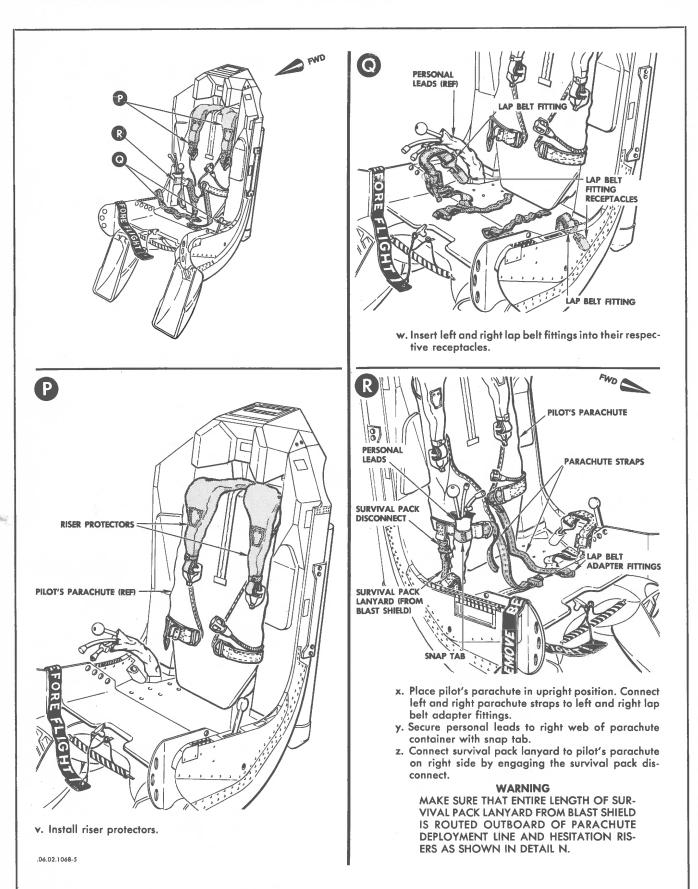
Seat Personal Equipment, Replacement for Operational Check (Sheet 5 of 5)
